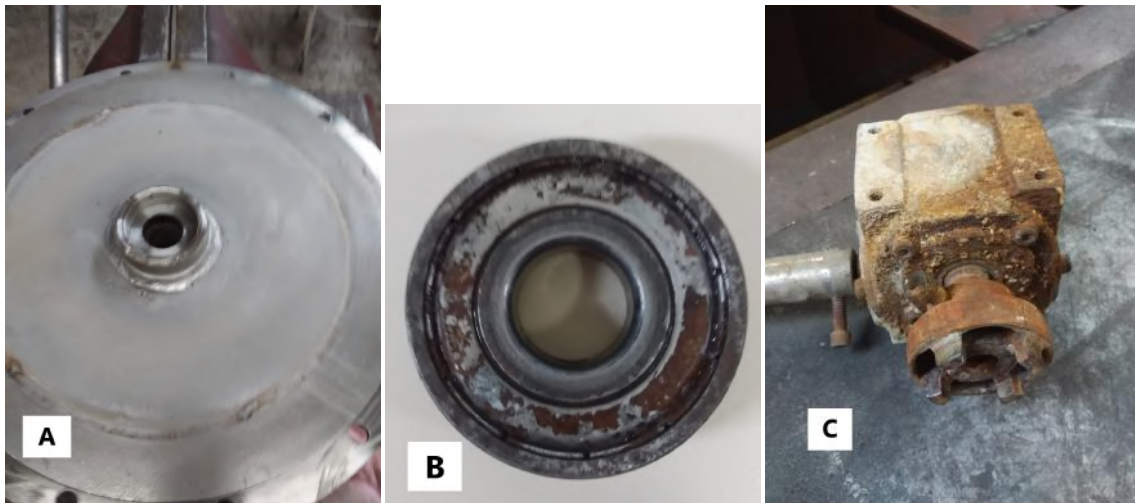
[A] Particles accumulated at the bottom of the tank system, causing erosion and damaging the bearing system [B] of the impeller in the tank, causing mixture leakage and in consequence damage over the reduction box system [C]
